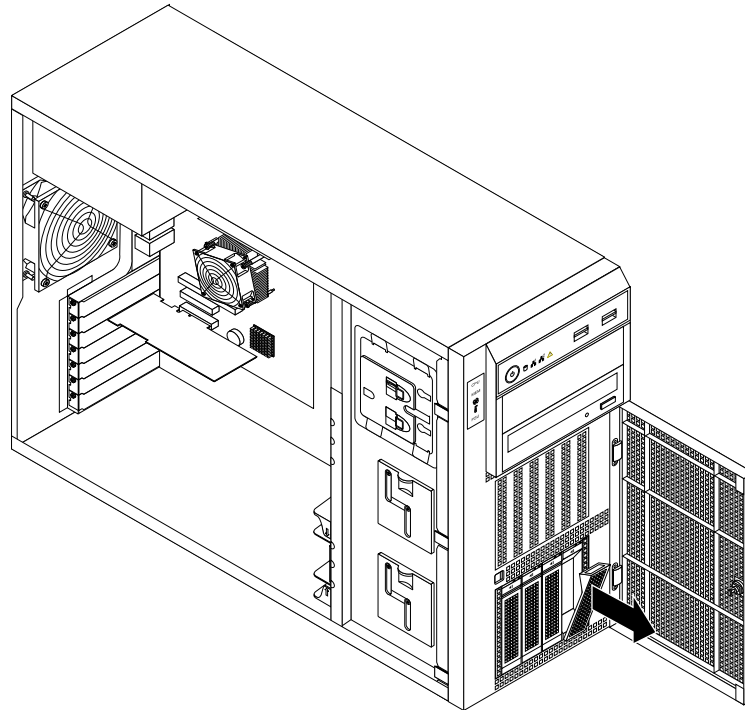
Removing the hot-swap hard disk drive or the dummy tray
